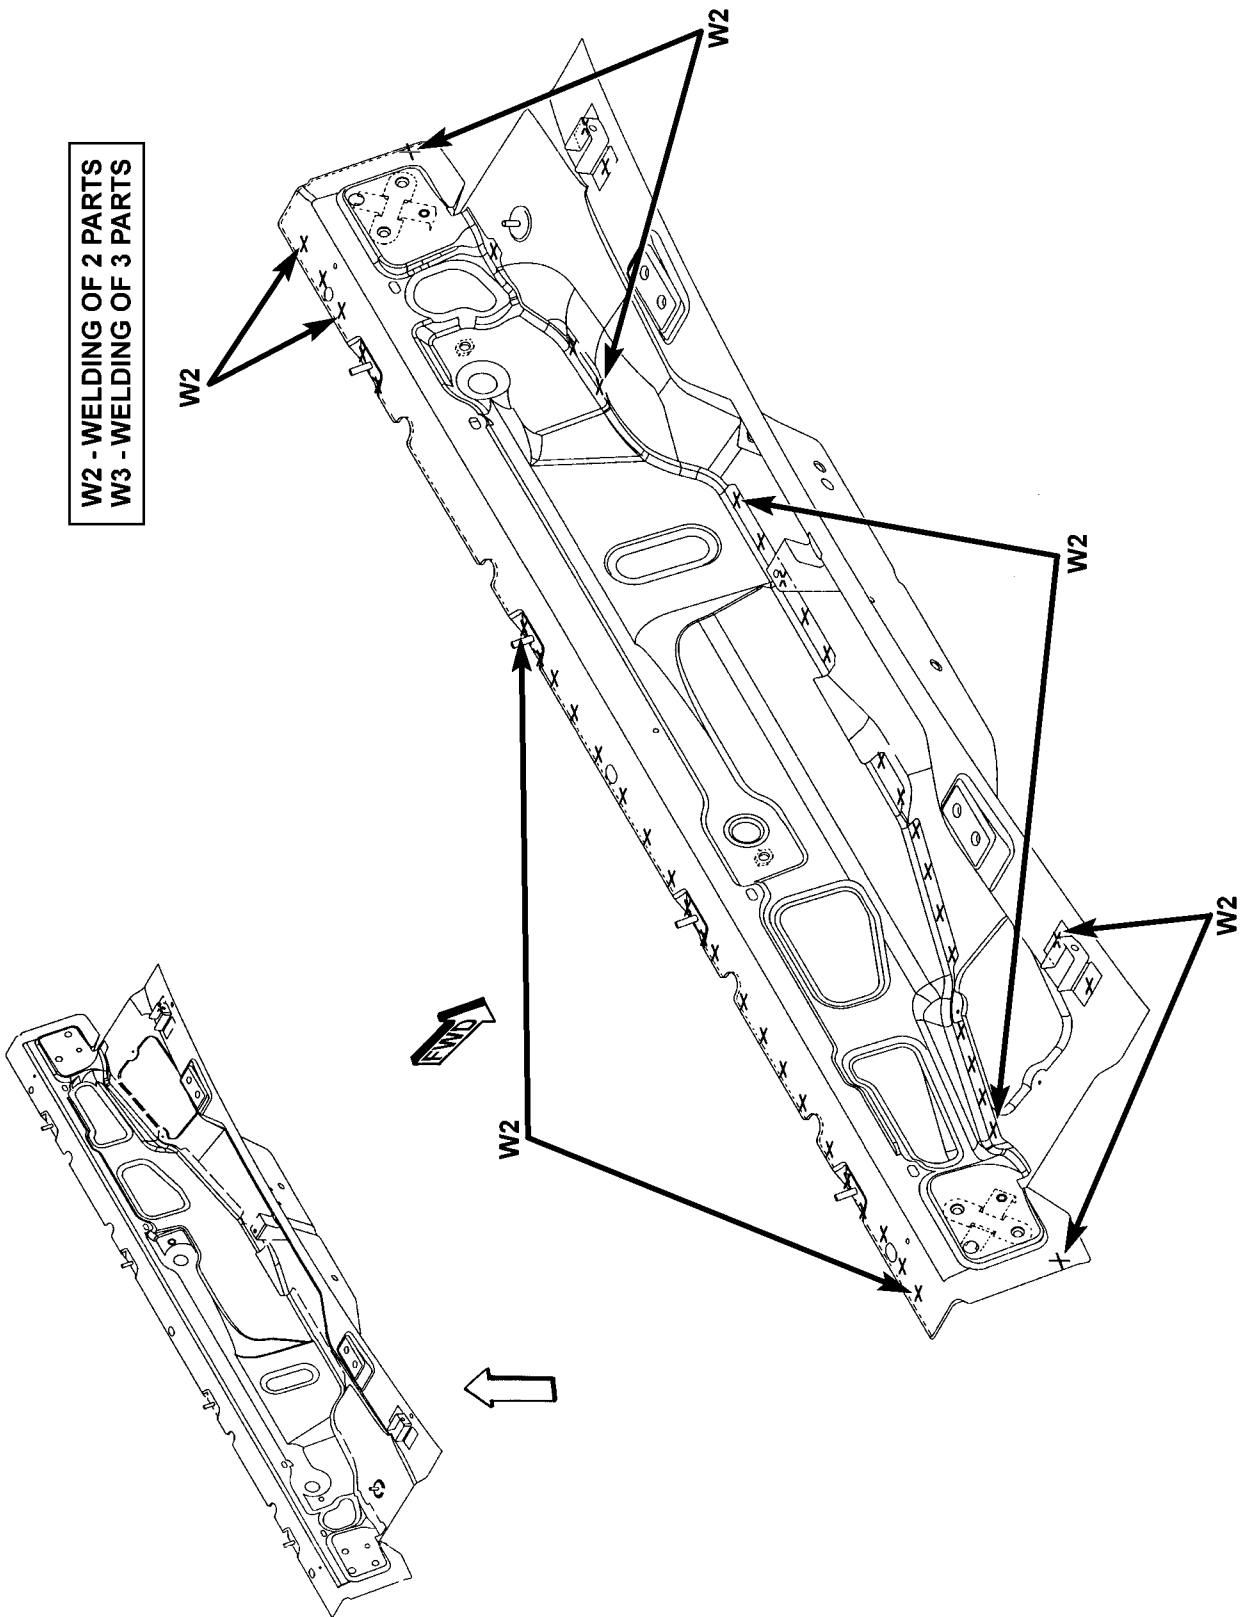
COWL ASSEMBLY - LEFT HAND DRIVE (1 OF 3)
